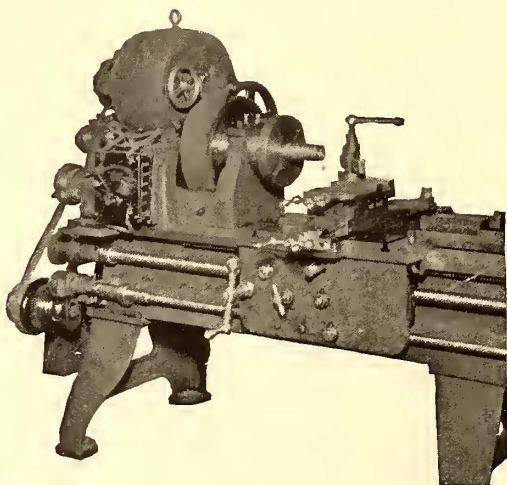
VARIABLE-SPEED MOTOR ON 16-IN. LATHE
